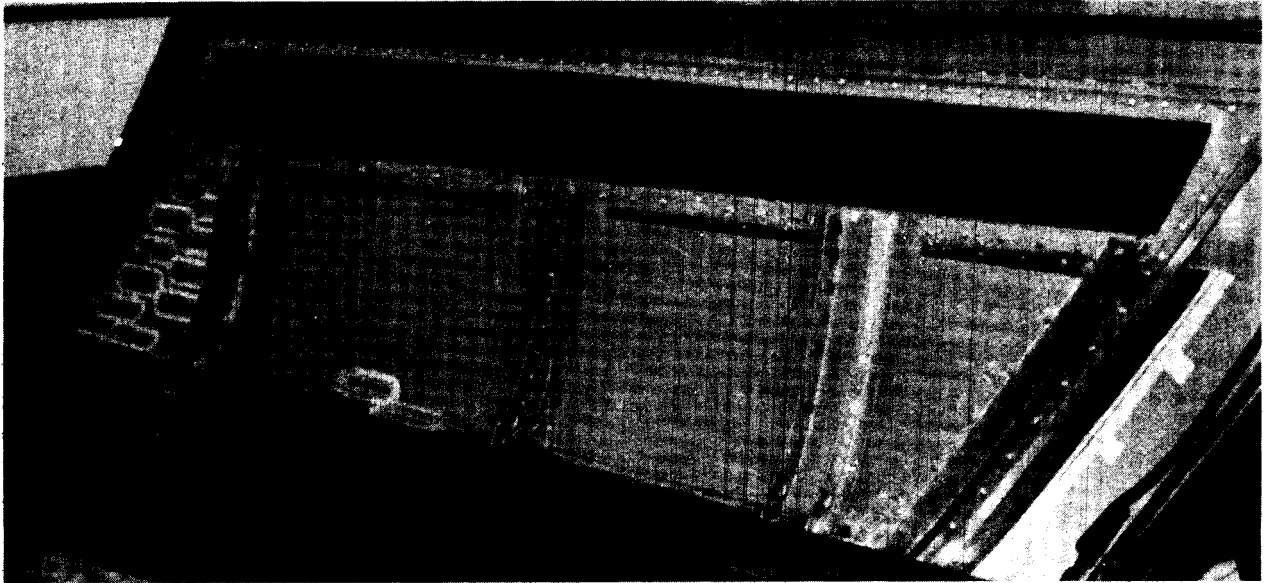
COMPLETED SUBSTRUCTURE ASSEMBLY
